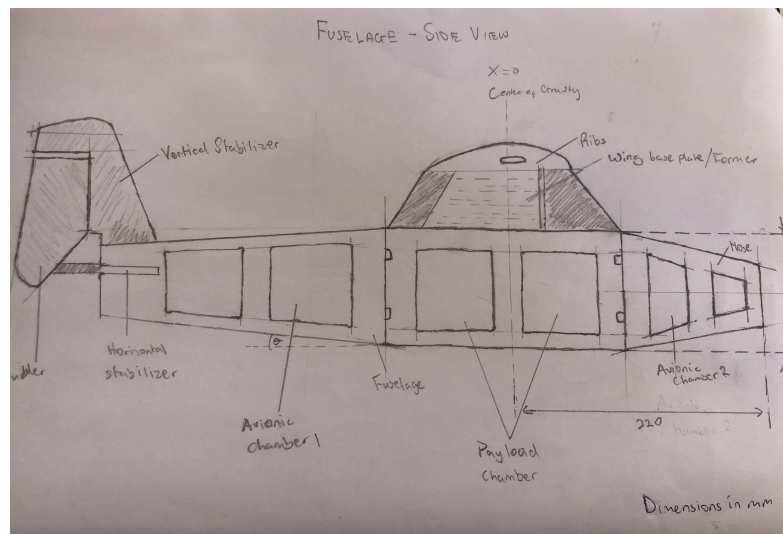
1 Sketch of fuselage side view. Dimensions in mm.
